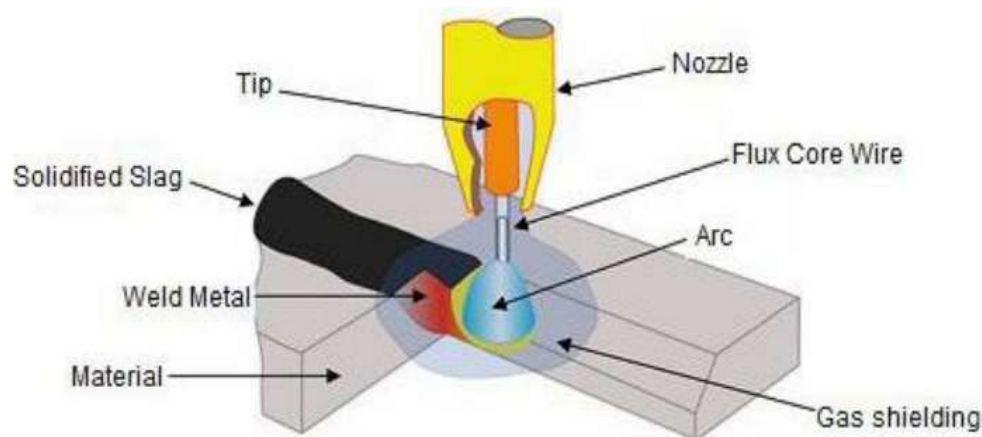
Flux cored arc welding (Joao, 2014)
